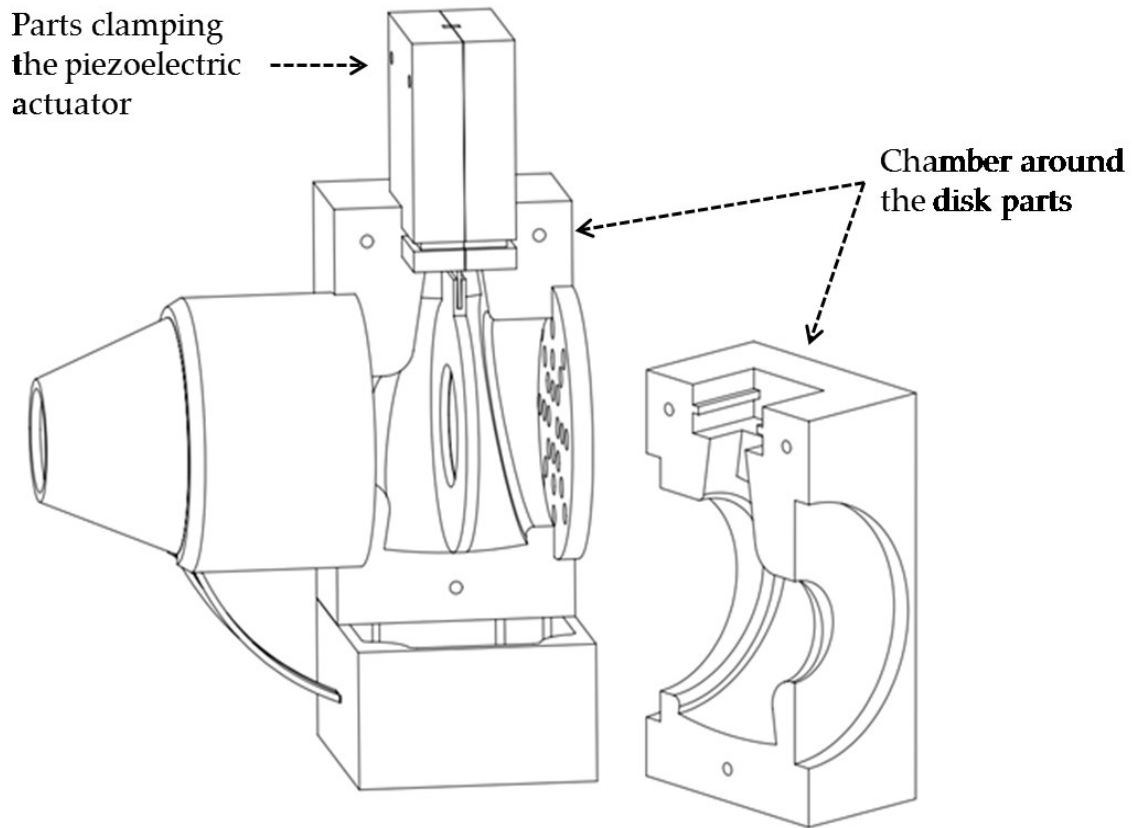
Isometric of the assembled 3D model of the single actuator prototype
